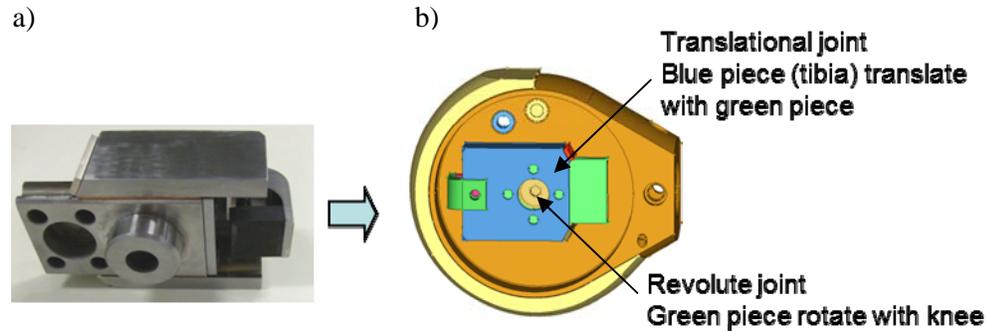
a) Physical knee slider of THOR-MK and b) three dimensional drawing of knee slider.
